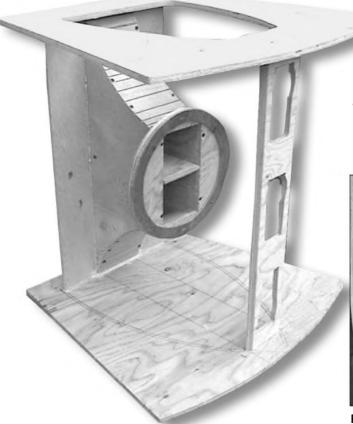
Assembly prior to horn brace installation. rate 80° cuts (or 100° , depending on point of view), instead of the usual 90° . Doing this on a table saw is easy if you first cut two pieces of scrap plywood at a 10° angle, using your miter gauge (*Fhoto 5*). Screw these directly to your panel-cutting jig (if you haven't yet made one, do it now), allowing you to feed a panel across the saw table at a perfect 80° angle (*Fhoto 6*).
